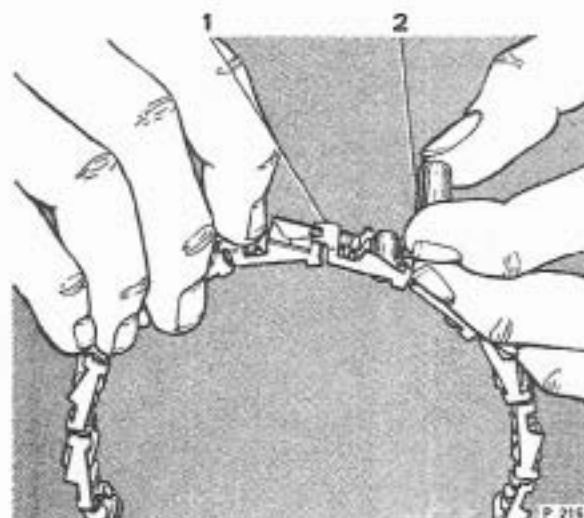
FITTING A ROLLER TO THE ROLLER CLUTCH CAGE (ROLLER CLUTCH)
